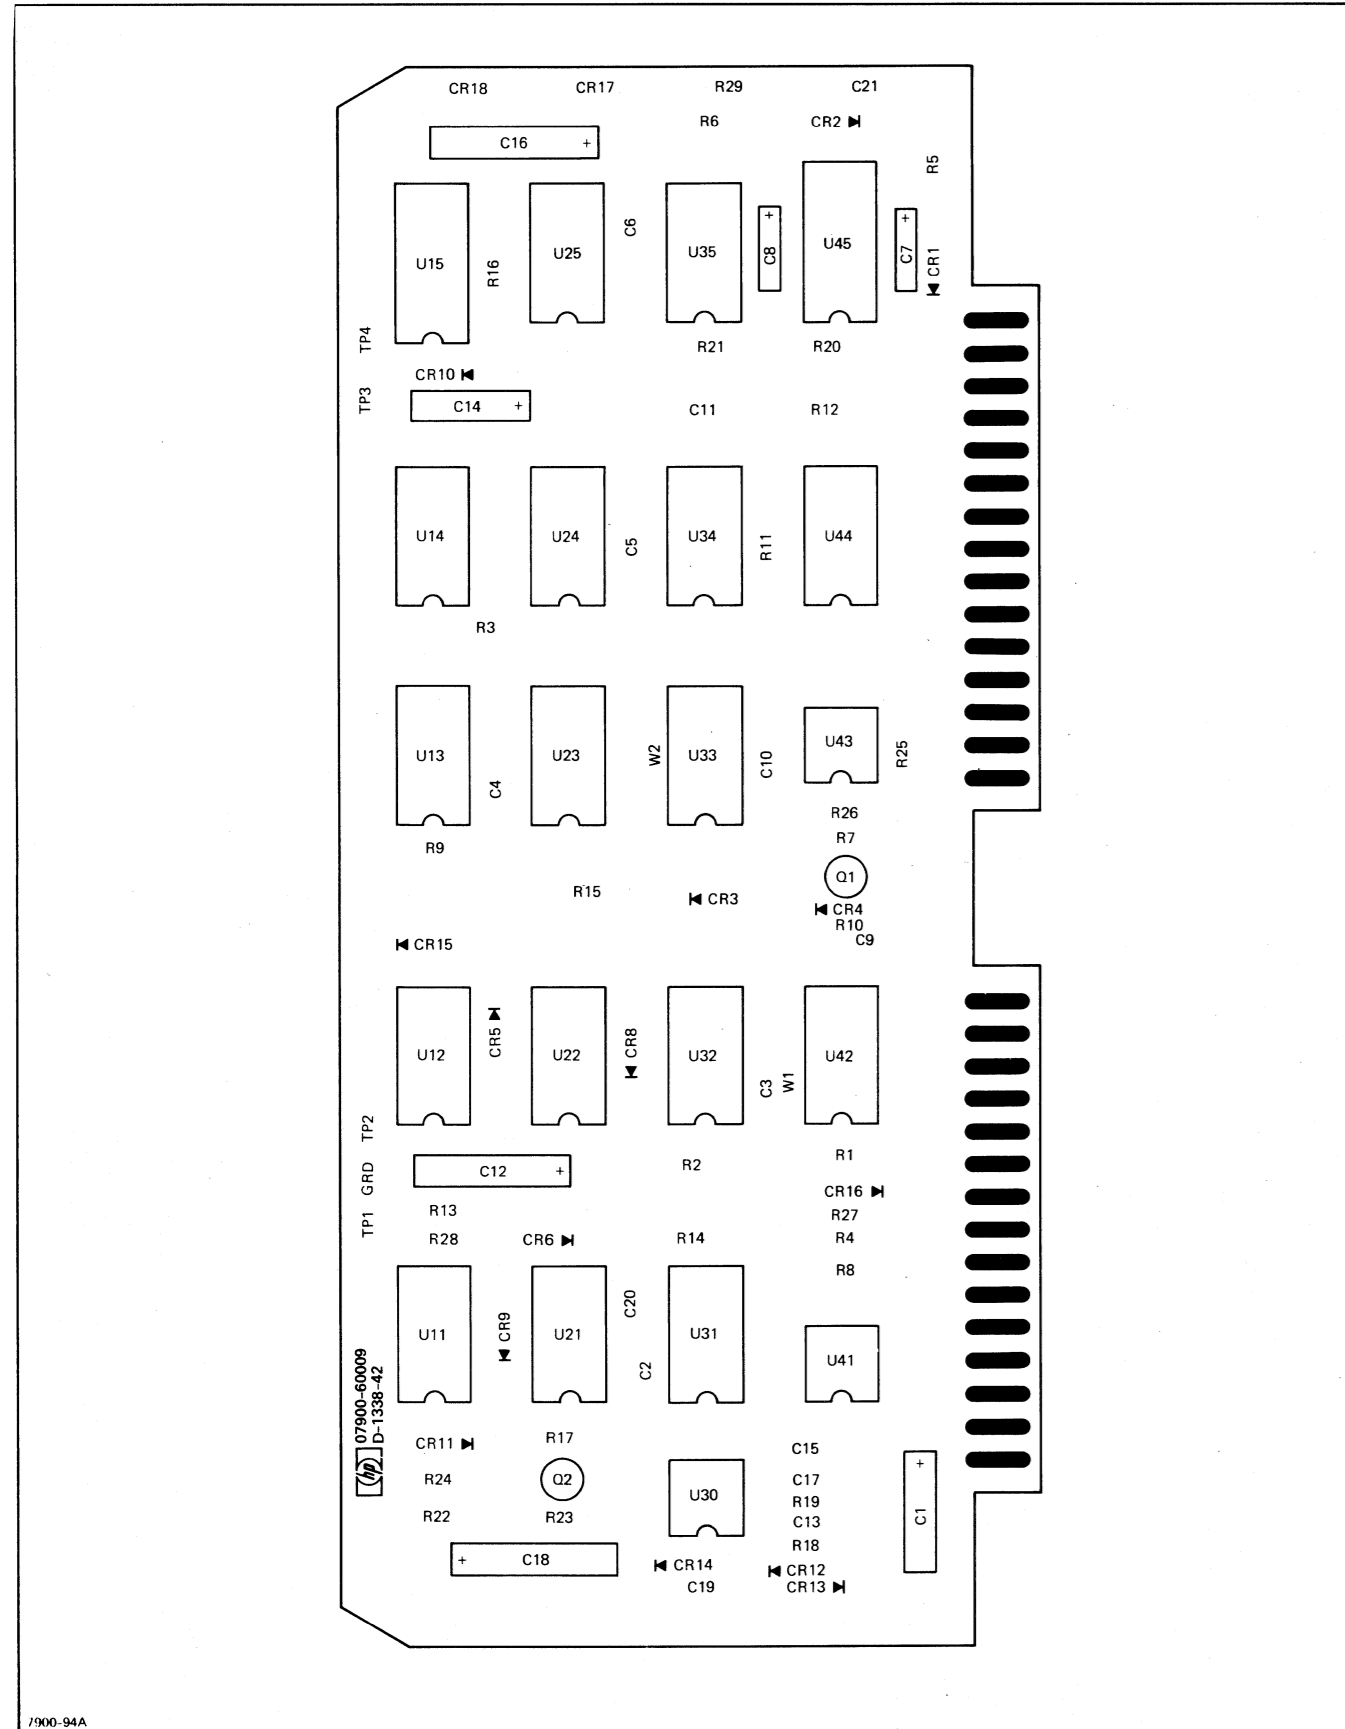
Drive Control Assembly A9 Parts Location Diagram
